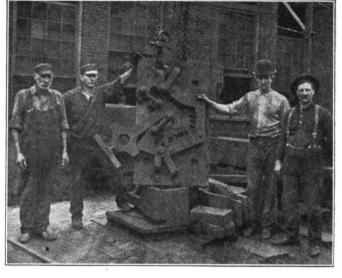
FOR BENDING WESTINGHOUSE FRICTION DRAFT GEAR YOKES
